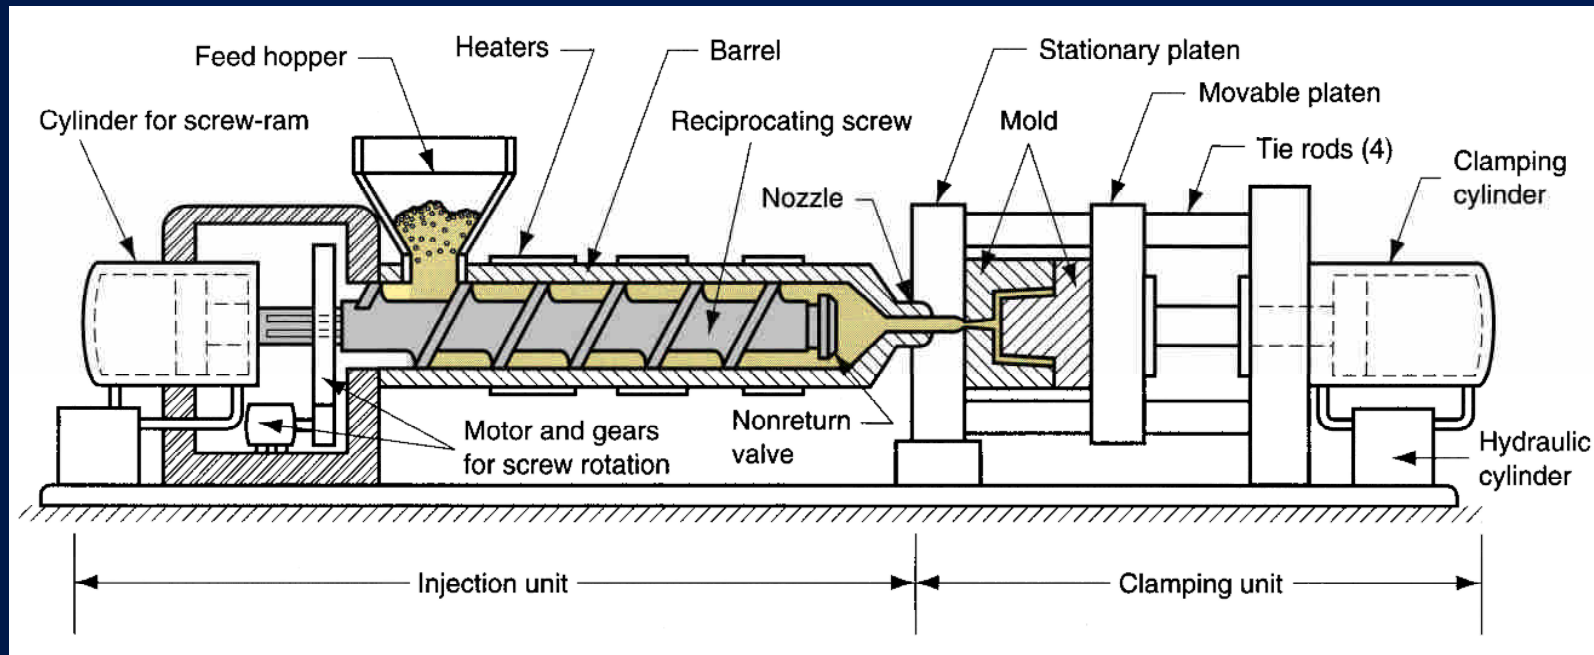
Diagram of an injection molding machine, reciprocating screw type (some mechanical details are simplified)
